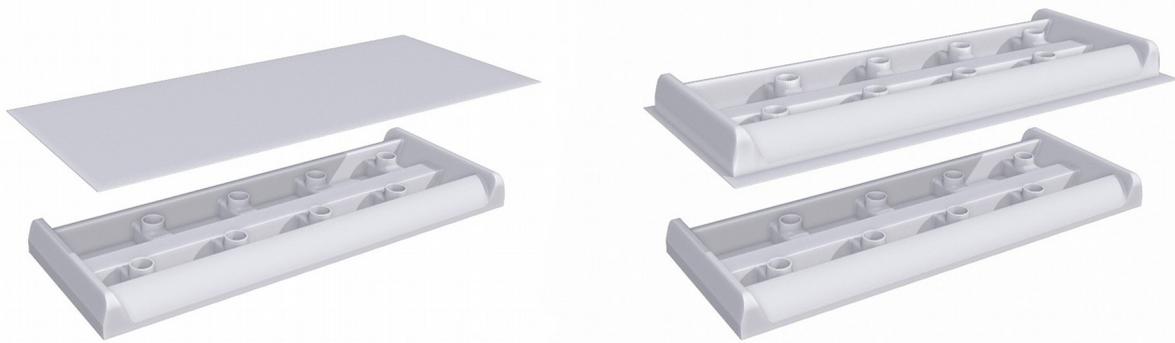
Final mould and vacuum forming process. The left shows the mould and sheet before vacuum forming and the right shows the resulting form.
